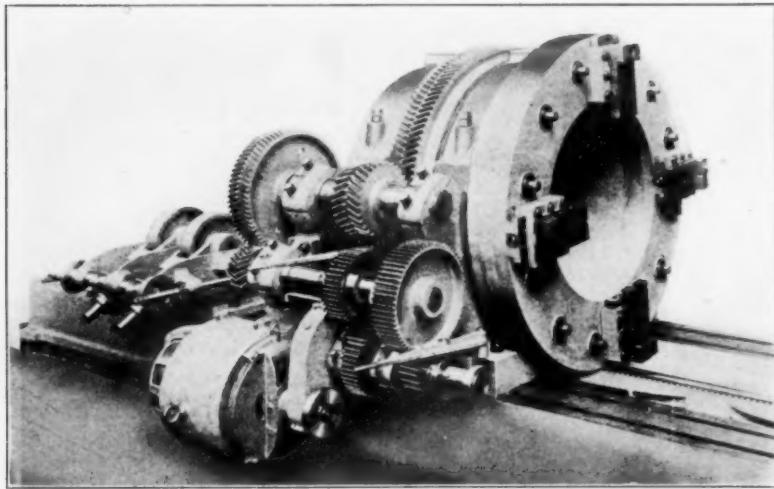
GUN-BORING LATHE WITH HERRINGBONE GEARS
